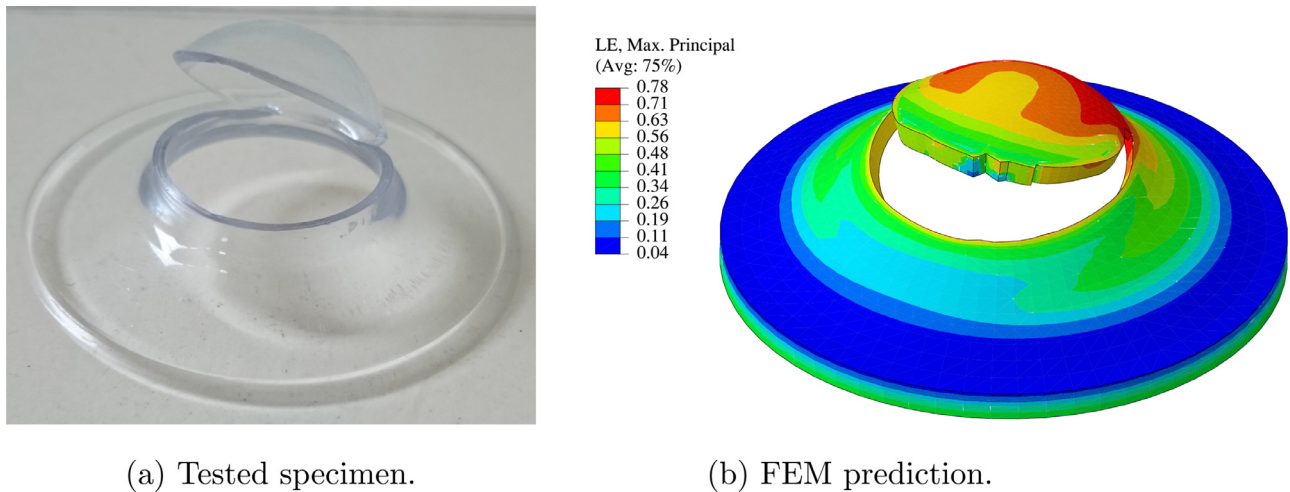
Fracture aspect of the FWT specimens tested using no lubricant.
